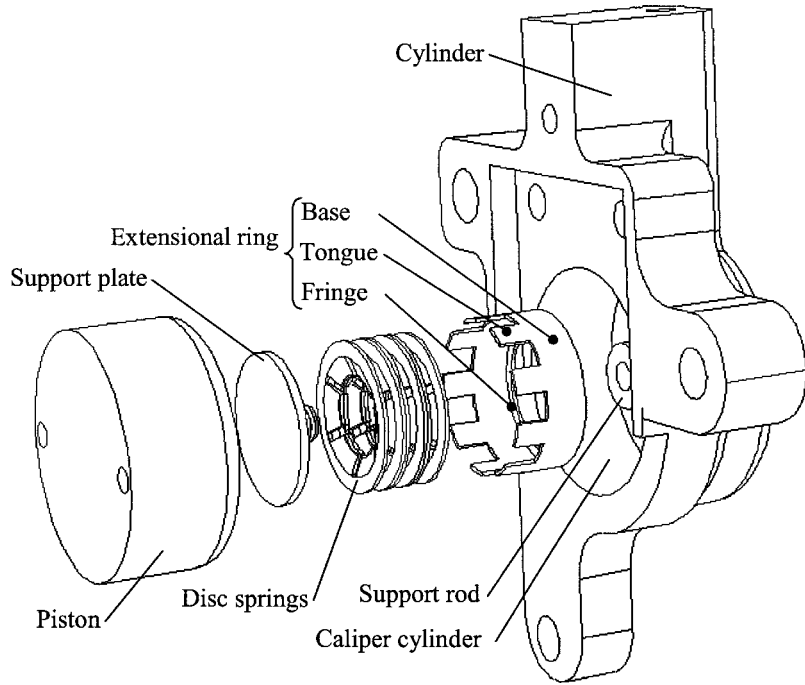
Composition of the proposed piston retractor (US patent pending)
